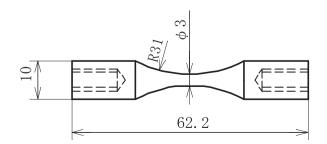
Profiles of the fatigue test specimens in millimeters.
